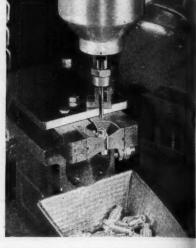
Set-up for tapping a fuse primer. Ms. chine: Haskins Special Air-Controlled Tappe. Tap: √3-inch, 32 thread, three flute. An automatic air vise with interchangeable jaws is used, the vise being adaptable for holding round work of different diameters.
